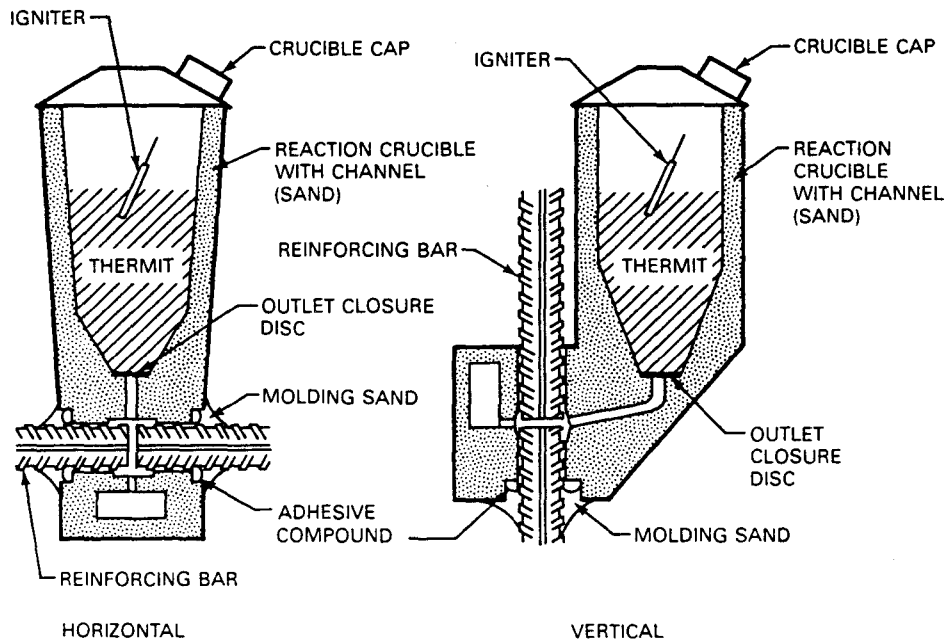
Thermit Welding Concrete Reinforcing Steel Bars
